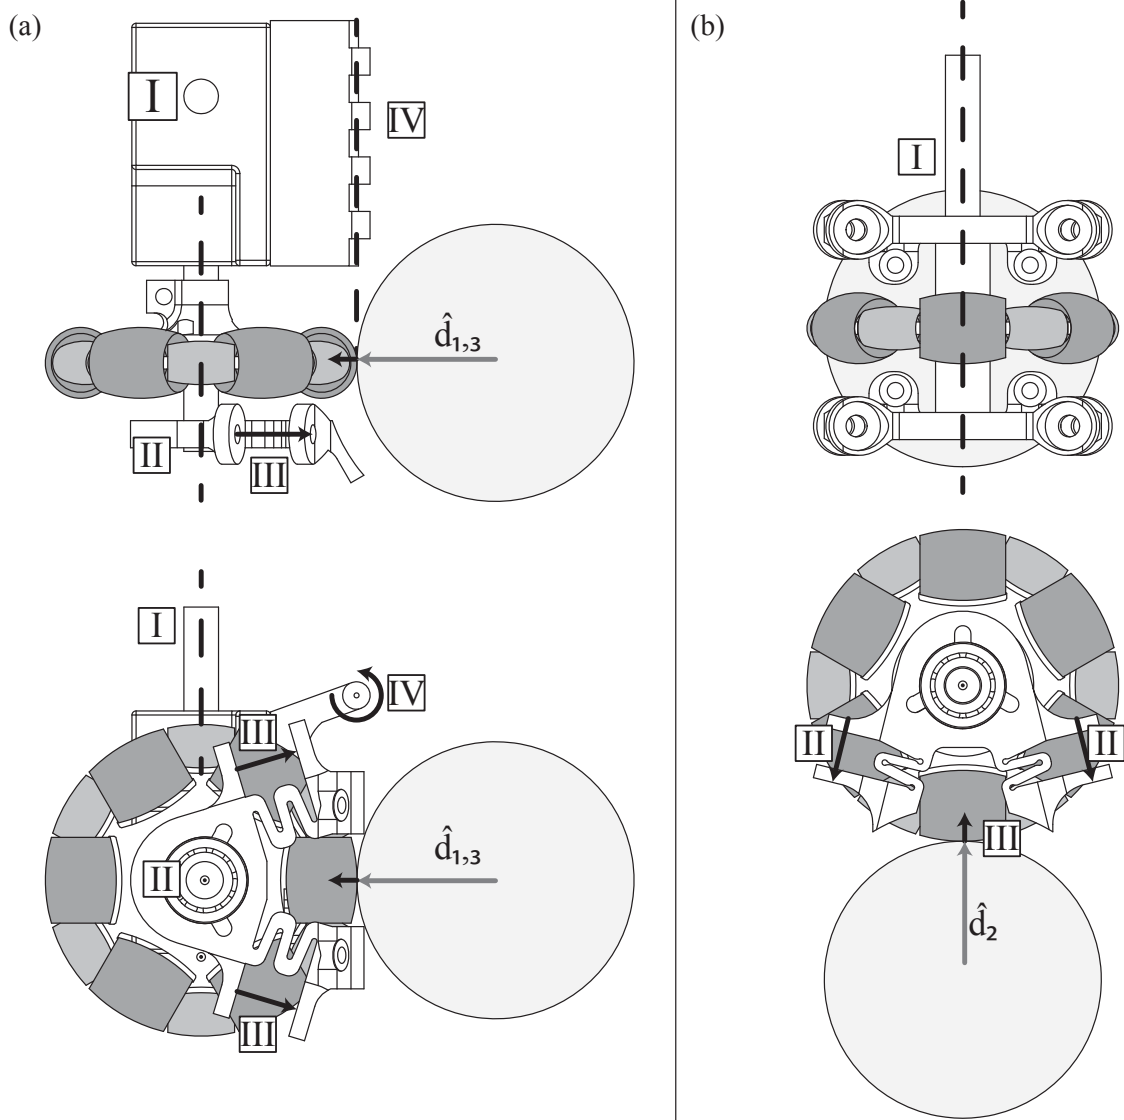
Motion in each of the omniwheel axes \hat{a}_i is shown. Planar-rotary motion in the 1st and 3rd omniwheels is illustrated (a), where the motor's axis (I) is transmitted through the 90° gearbox to the omniwheel axes (II). Adjustable spring-tensioned pillow blocks provide force (III) between the omniwheel and the spherical magnet, allowing for compliance (IV) locally parallel with \hat{d}_i . Translational motion in the 2nd omniwheel is shown in (b), where the motor axis and the omniwheel axis are coaxial (I). Adjustable spring-tensioned pillow blocks provide force (II) between the omniwheel and the spherical magnet, allowing for compliance (III) parallel with \hat{d}_2 .
